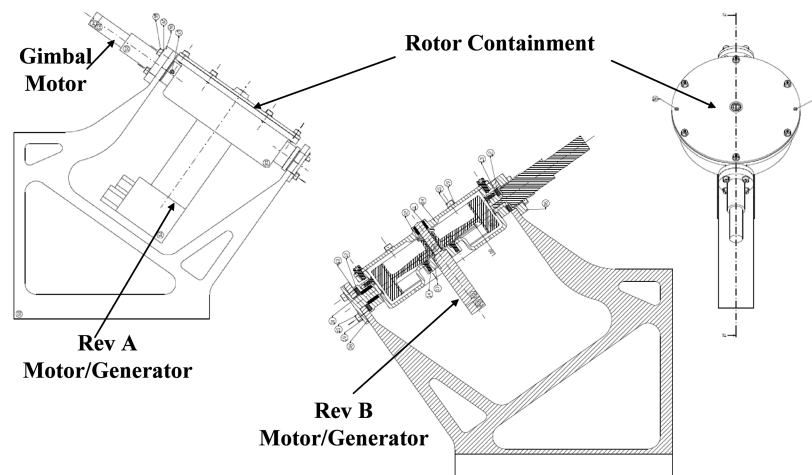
Surrey Space Centre ESACS VSCMG assembly design.
